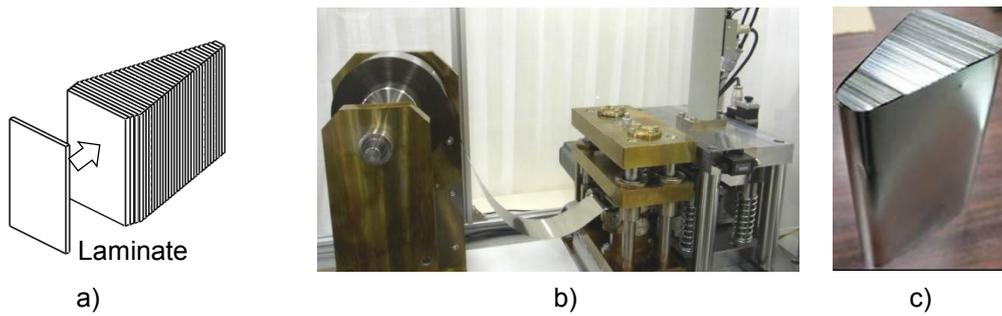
Developed core and manufacturing equipment: a) AMM stratified core, b) manufacturing equipment, c) test core
